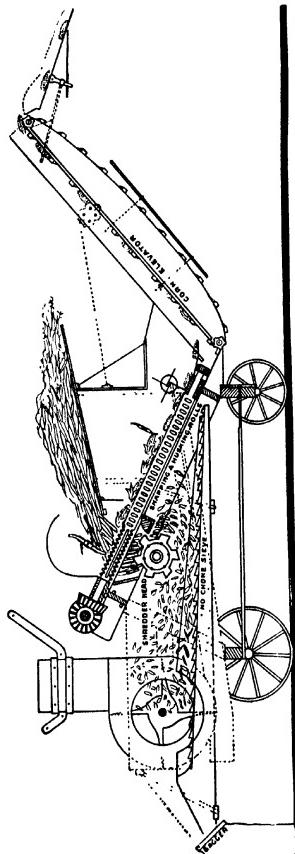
Sectional view of husker-shredder (combined snapping and husking roll-type).
